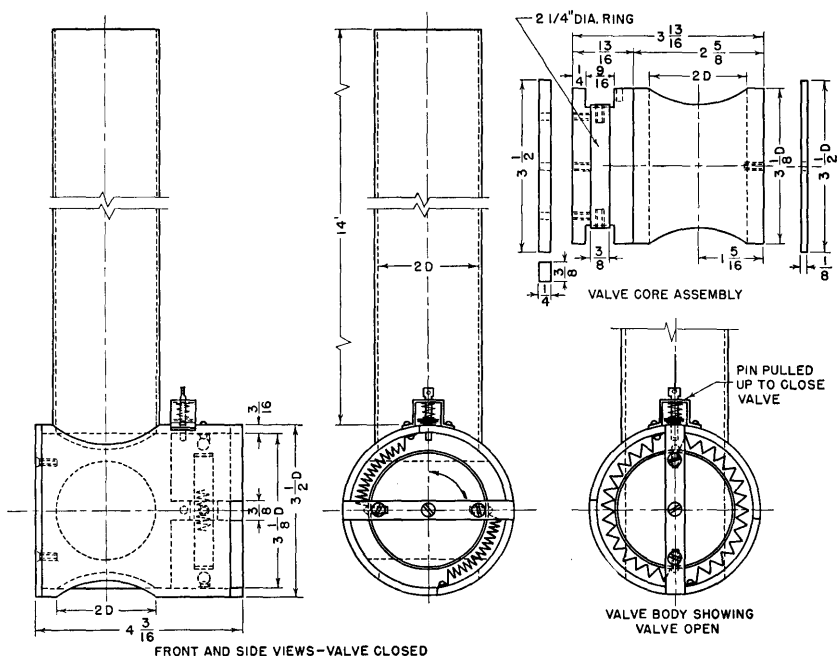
DETAILED DRAWING OF KRAFT SLUDGE SAMPLER
